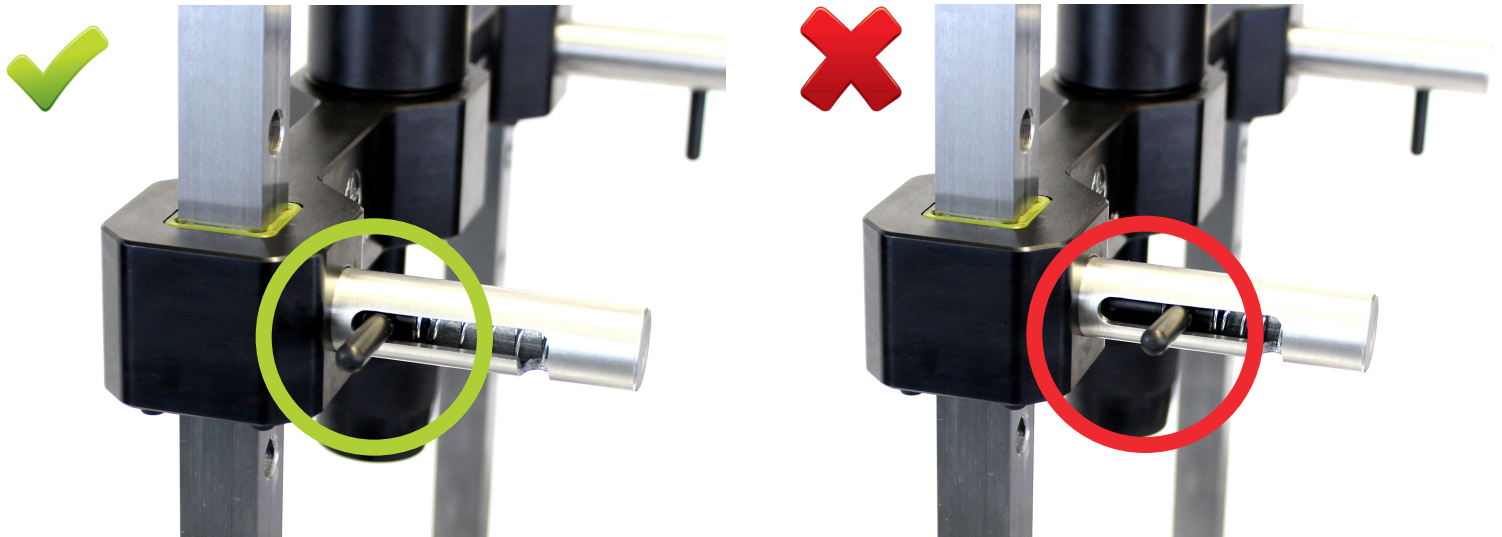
Quick-Change Latch: a) Correct: Fully Engaged, b) Incorrect: Partially Engaged
